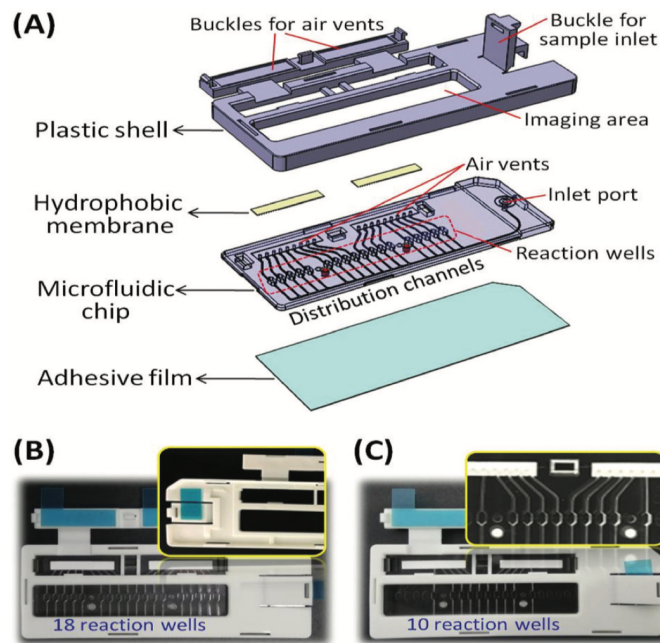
Detailed chip design. (A) Exploded view. (B) Pressure sealing component. (C) Multiplexed reactors [9].
